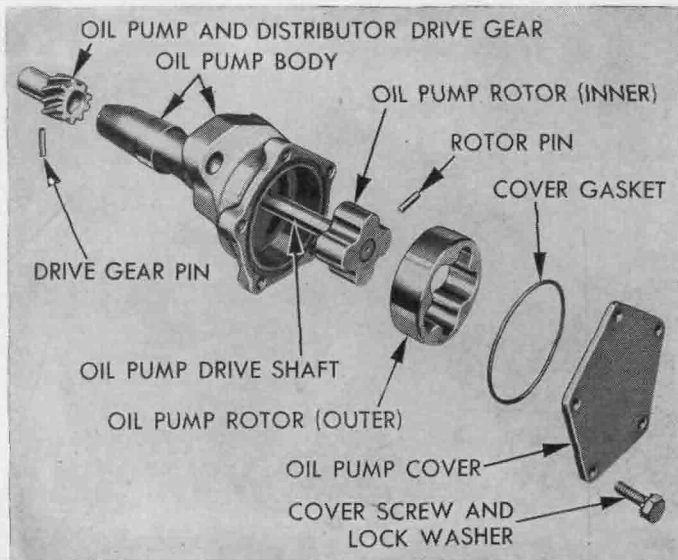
Disassembled view of a rotor-type oil pump. (Dodge Division of Chrysler Corporation)
